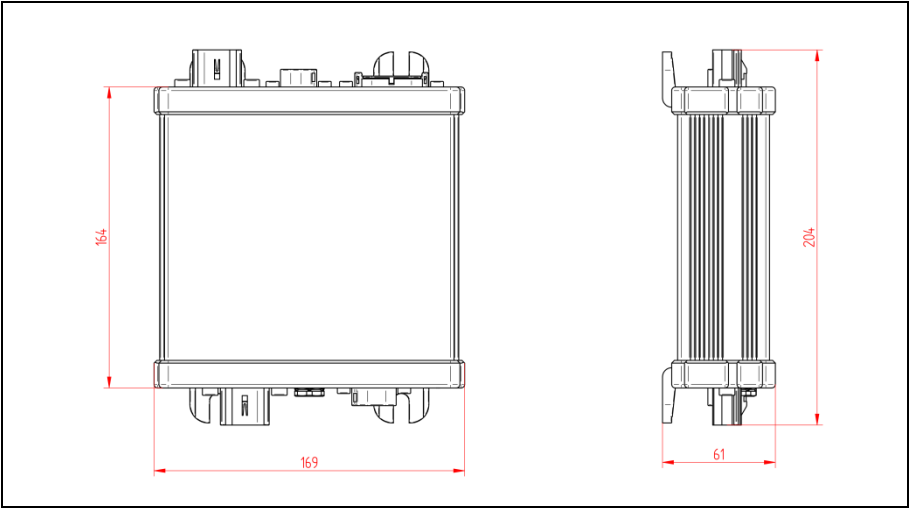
Motor ECU dimensions *code 10CEN-0003
